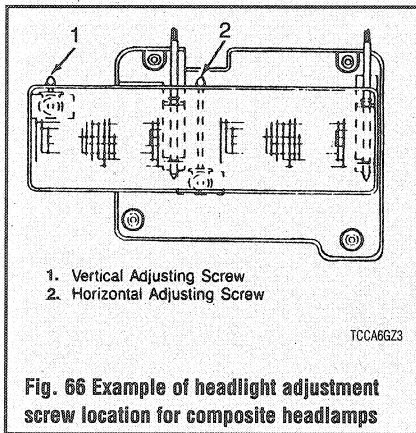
Example of headlight adjustment screw location for composite headlamps
